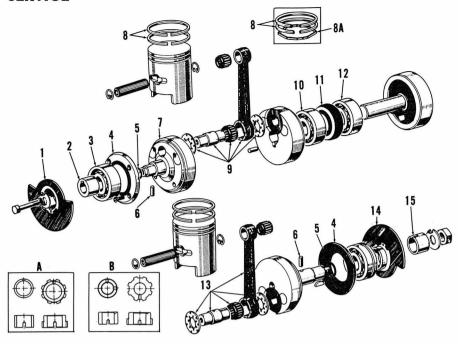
Exploded view of A7 crankshaft assembly. Expander ring (8A) and oil receiver (4) are not used on A1 models. Replacement ring sets equipped with expander ring (8A) may be installed on early A7 pistons that originally did not have expander.
